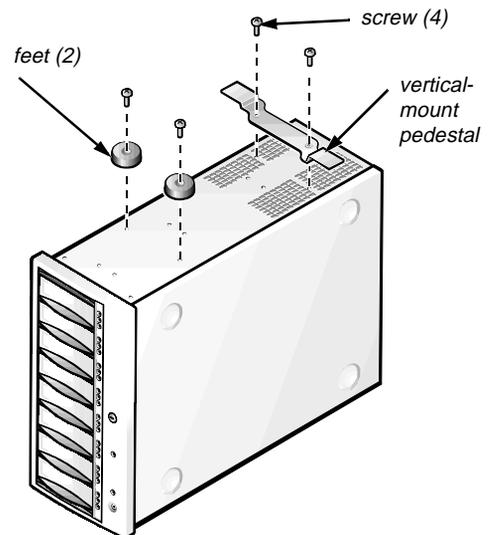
Installing the Feet and Vertical-Mount Pedestal
